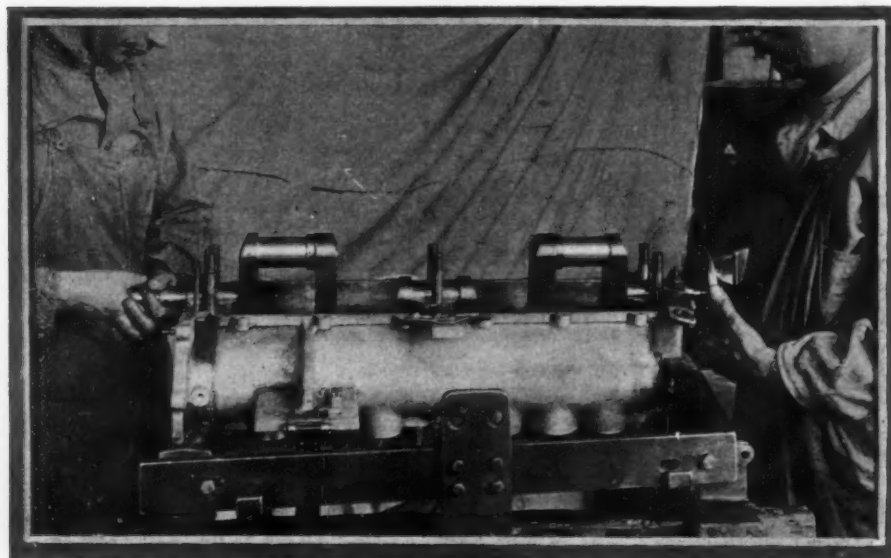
The correct method of lifting the crankshaft into the bearings so that the bluing effect will be uniform
